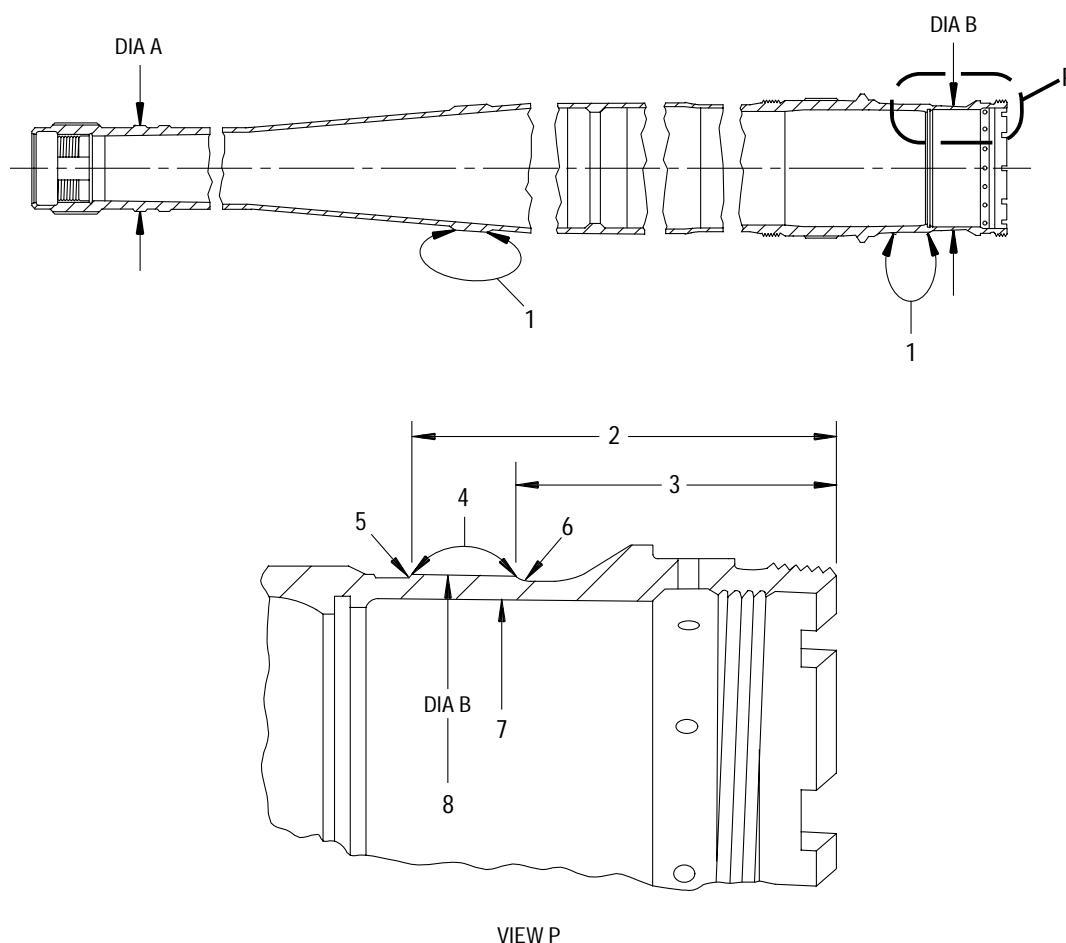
Front Compressor Drive Turbine Shaft - No. 5 Bearing Journal Repair
